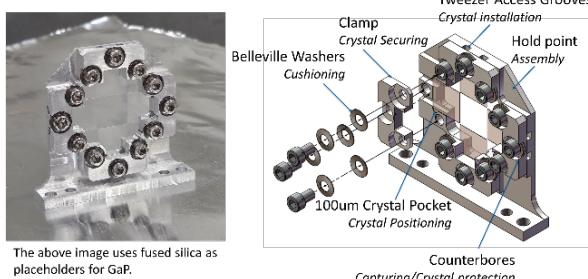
(left) holder with fused silica placeholders installed. (right) exploded view of holder.
